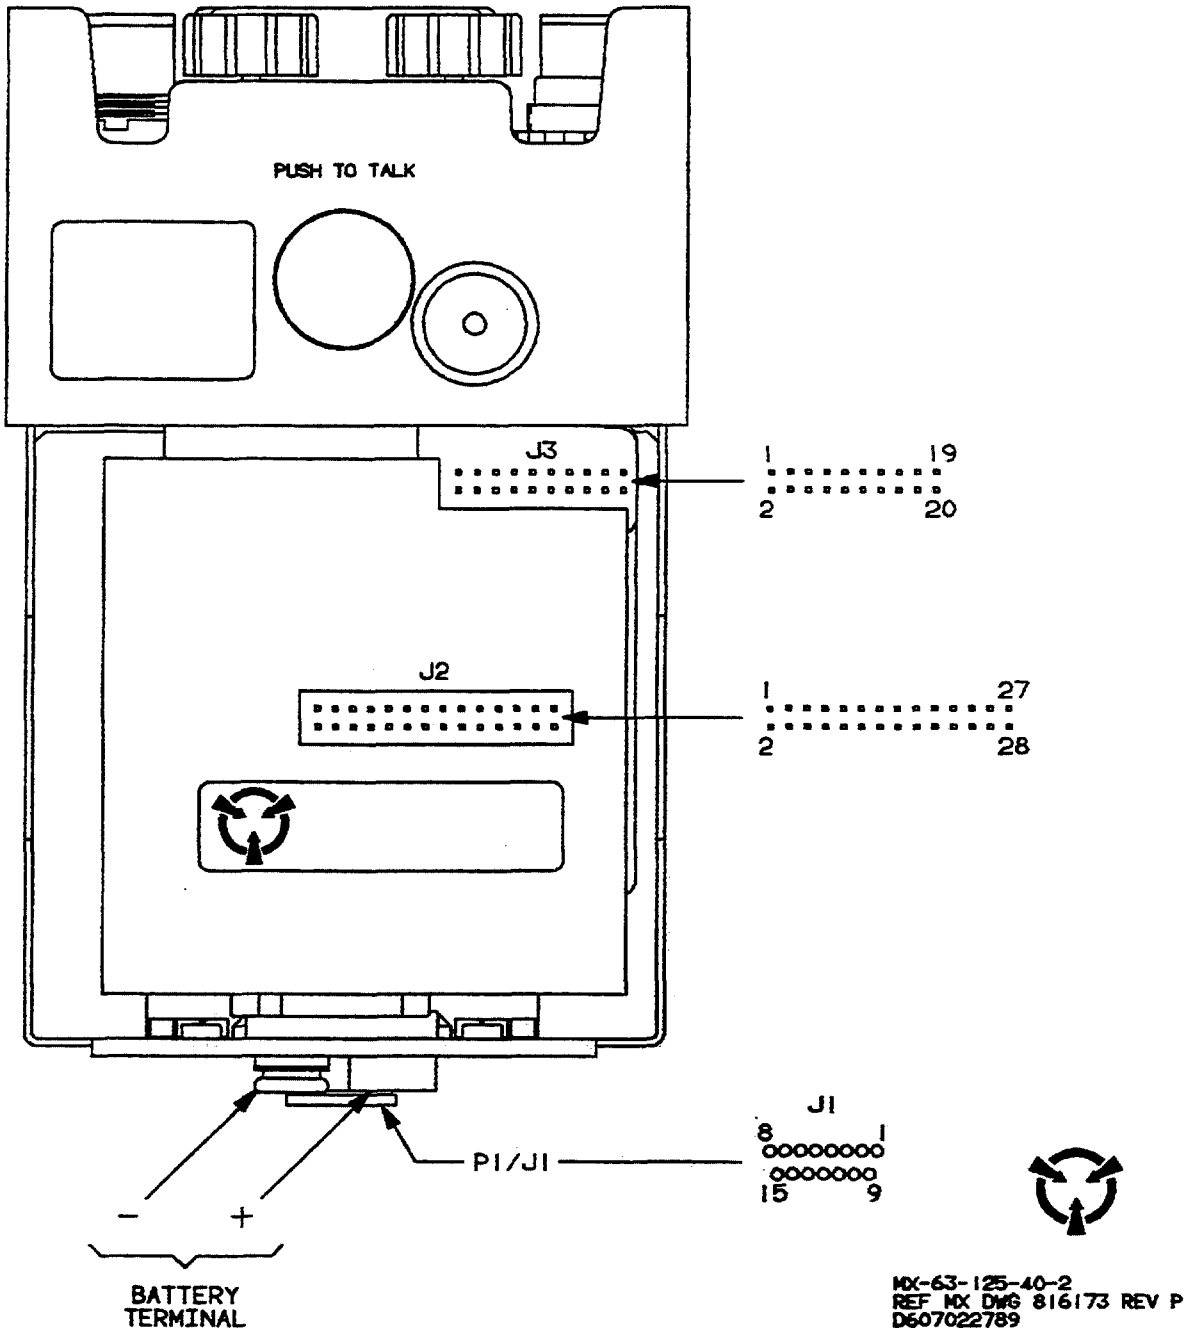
RT Frame/Panel Component Location (Sheet 2 of 2)
